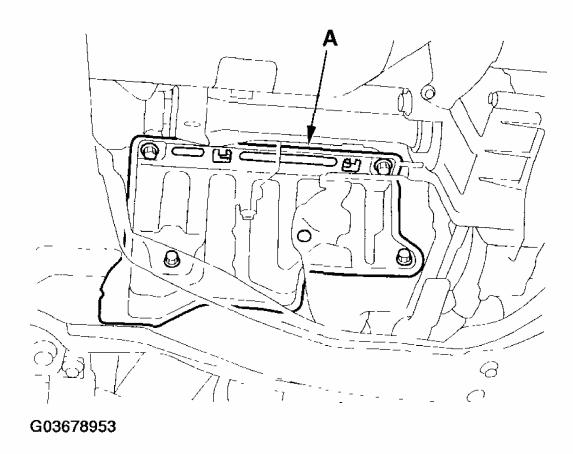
Removing P/S Heat Baffle Plate Courtesy of AMERICAN HONDA MOTOR CO., INC.
